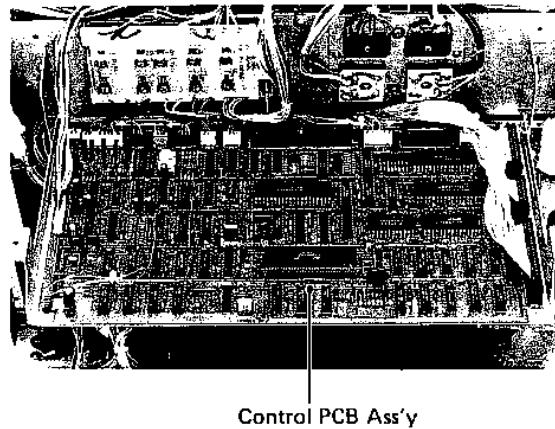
CONTROL PCB PULLED TOWARD YOU
